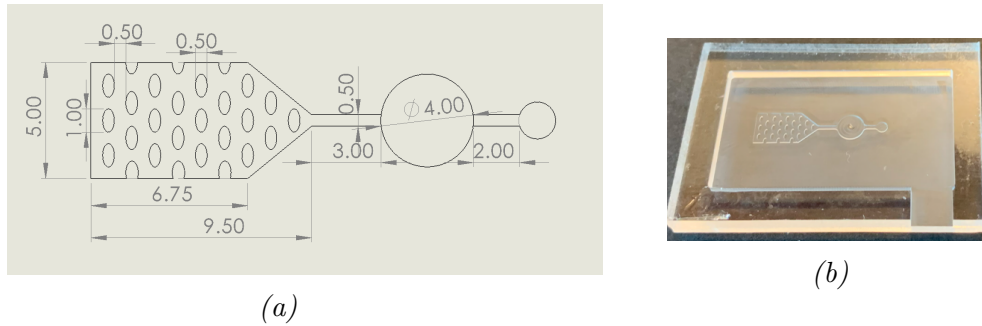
The technical drawing of the smallest BPS design with top view (a) and the created PMMA mold (b).
